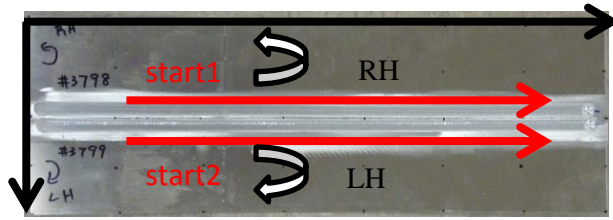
Picture of same welding direction with LH and RH thread pin tool
